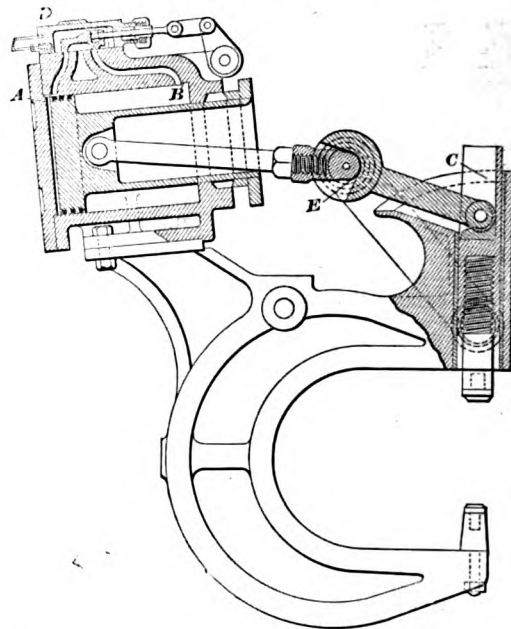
Sectional View, Allen Pneumatic Riveter.
